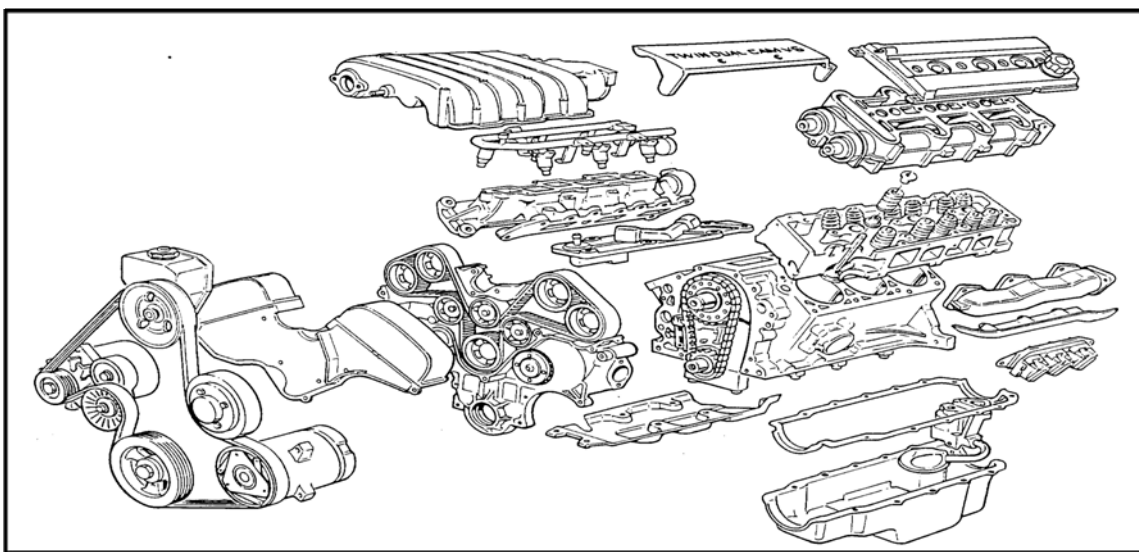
GM 3.4L Twin Dual Cam V6 Components.
